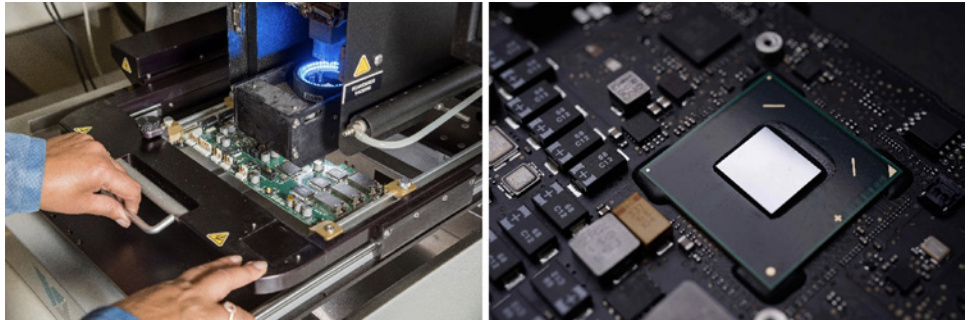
BGA removal with hot air rework system and salvaged BGA mounted on a new PCB.
